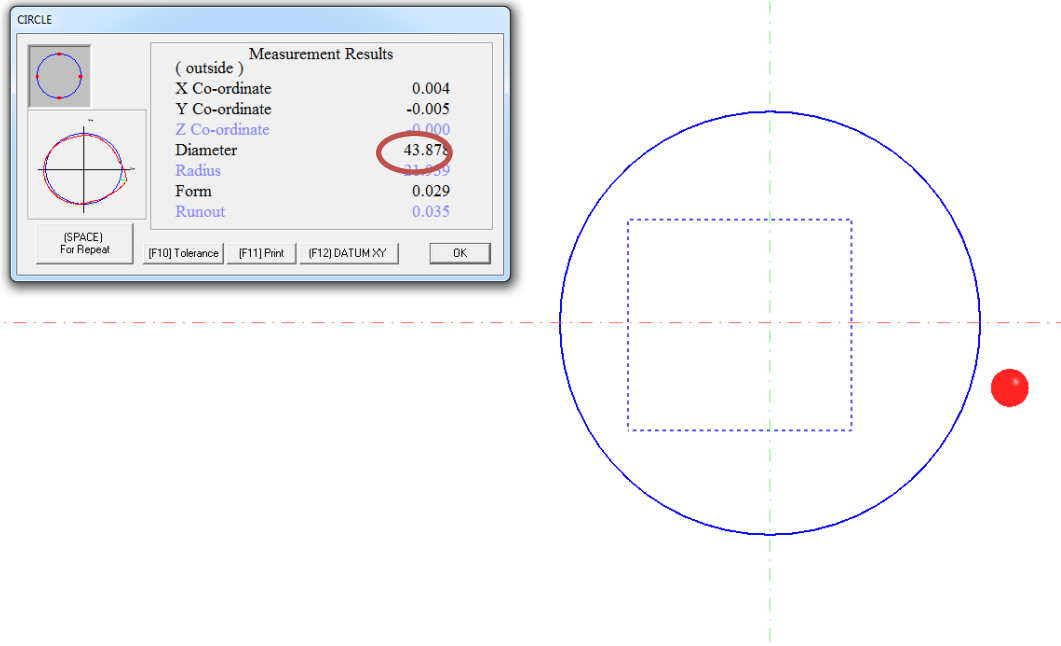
CMM Results of Left-hand Side Seal Groove of the Piston
